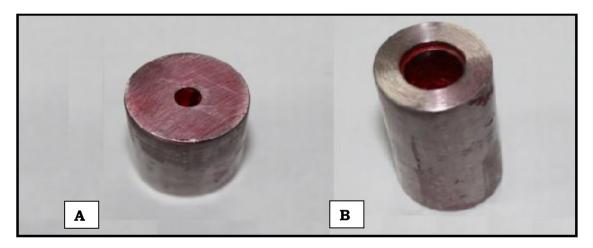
Lipstick molds tapering dimensions (A) and front dimension (B)
